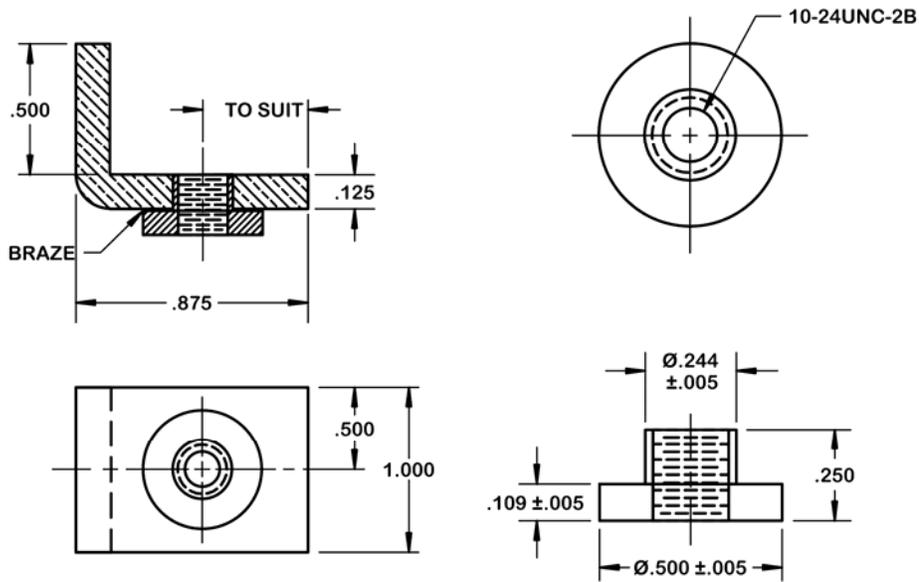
Terminal board mounting bracket, L-configuration, short.
